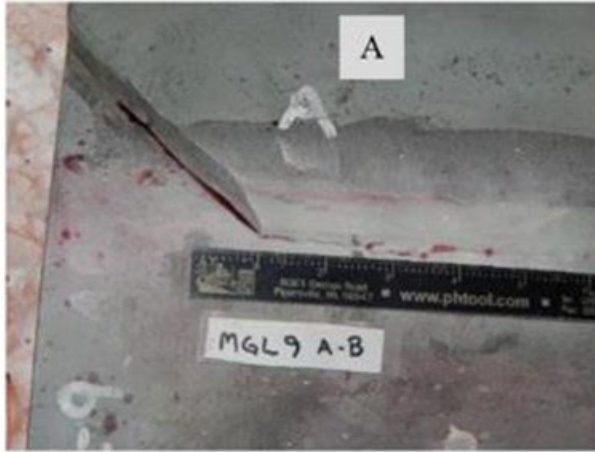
MGL-9-A-B simulated fatigue crack fillet weld MG panel
